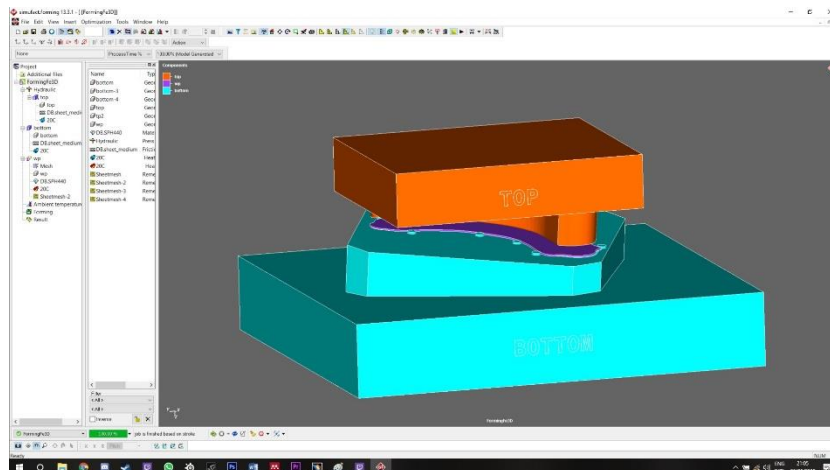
The assemble of the dies and workpiece in Simufact.forming
